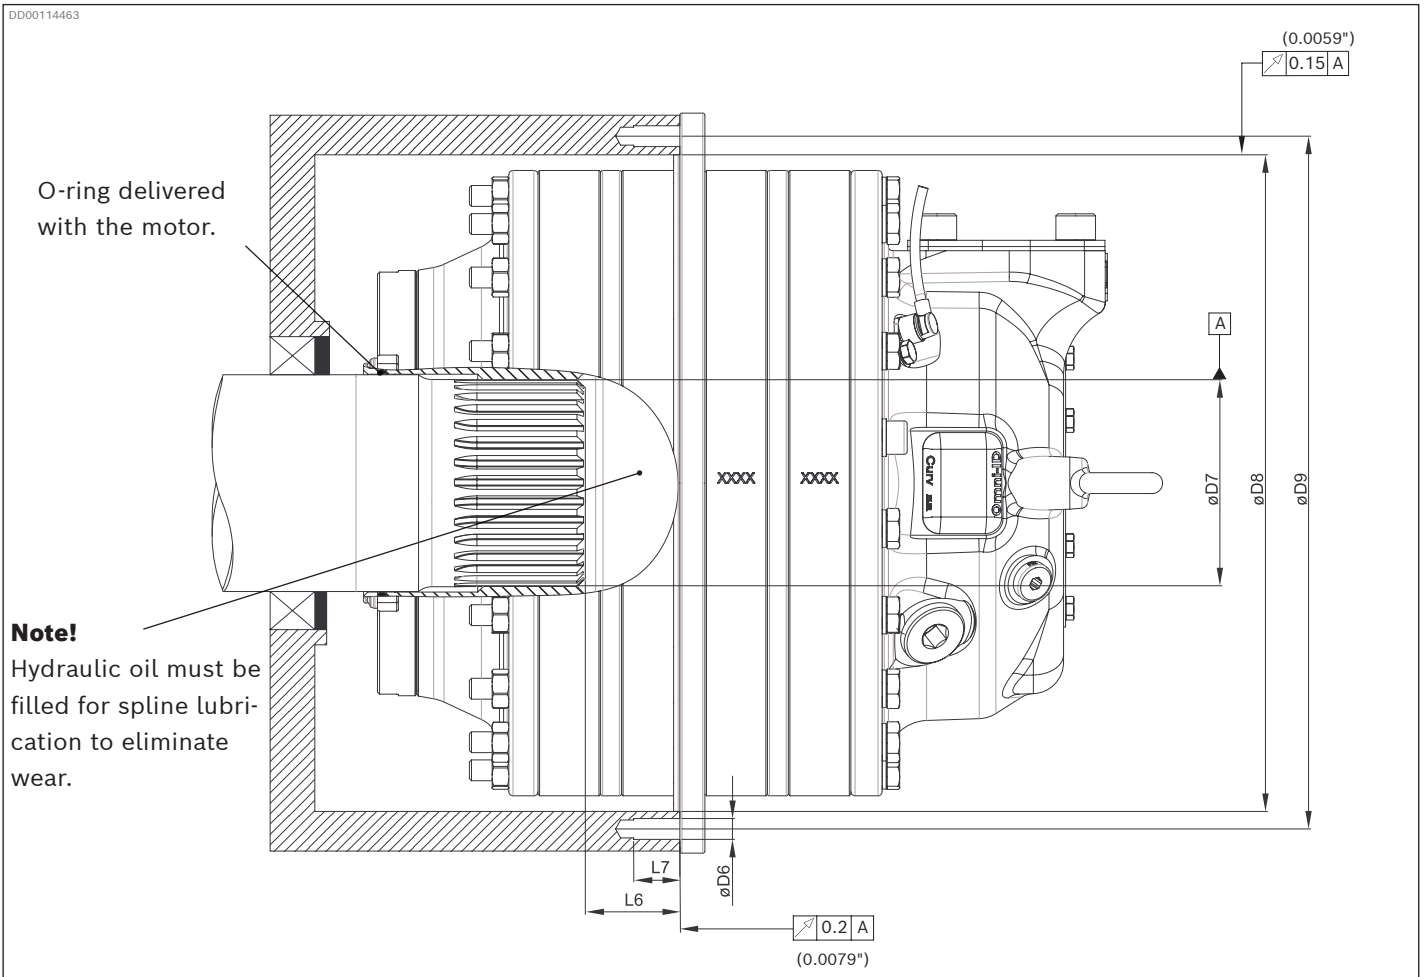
Shaft installation tolerances Atom 30 C (center flange), Atom 40
